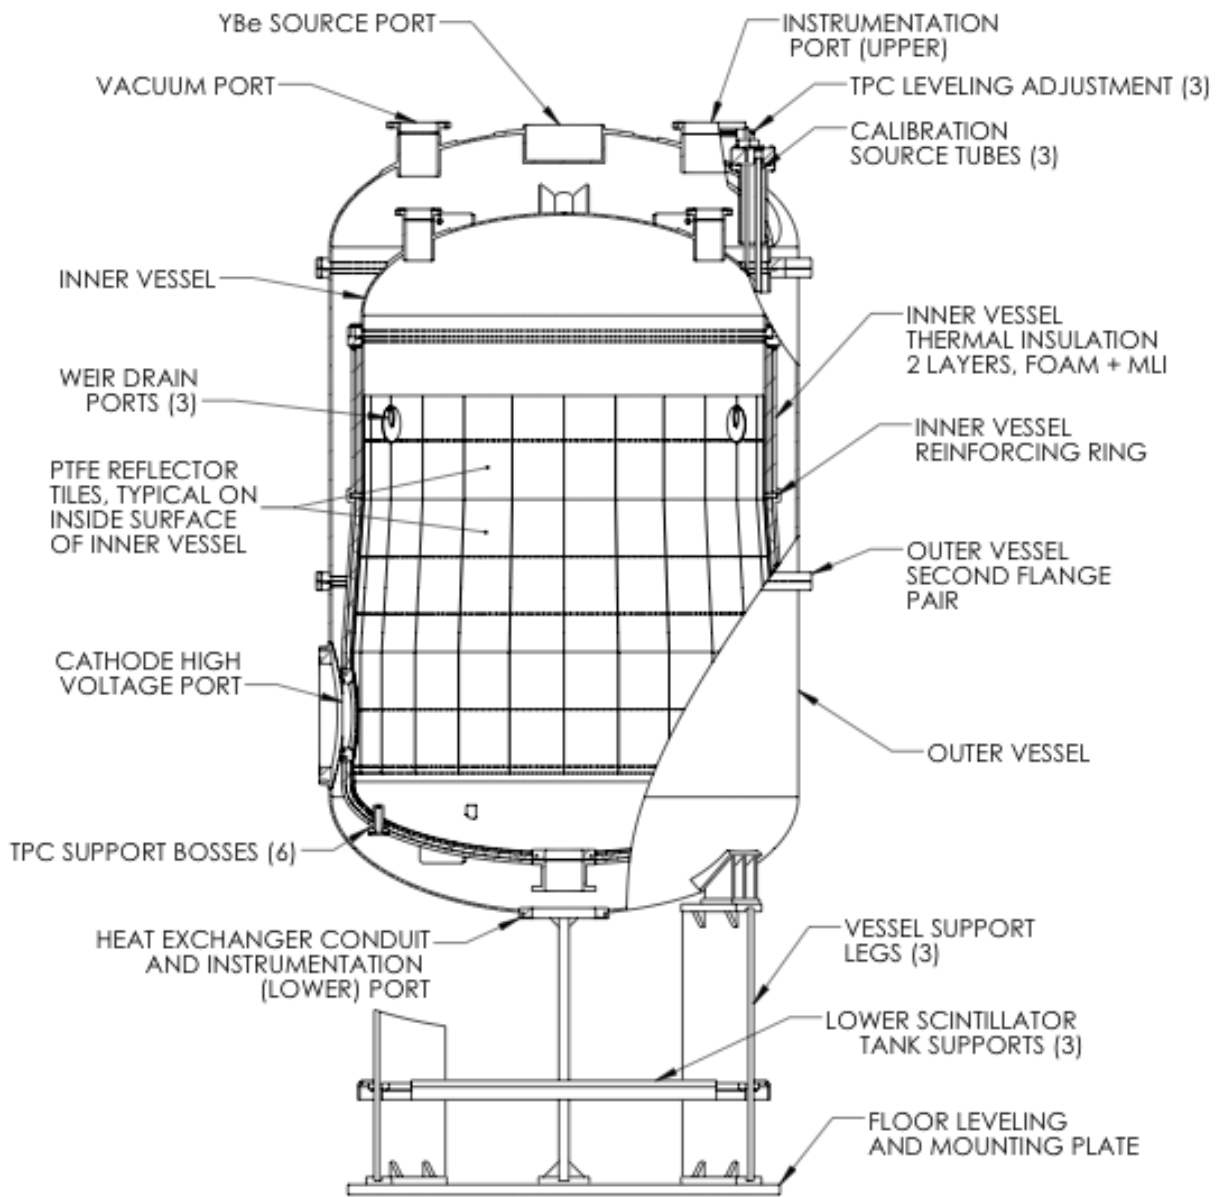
View of the LZ cryostat. Main parts of the inner and outer vessel assembly are highlighted.
